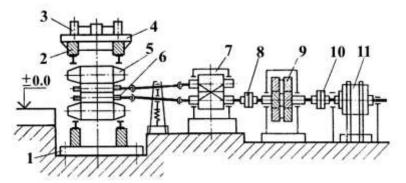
Scheme of a mill: 1-bed of roll stand; 2-4-pressing device; 5,6-support and working rolls; 7-pinion stand; 8,10-clutch; 9-reduction gear; 11- electrical motor
